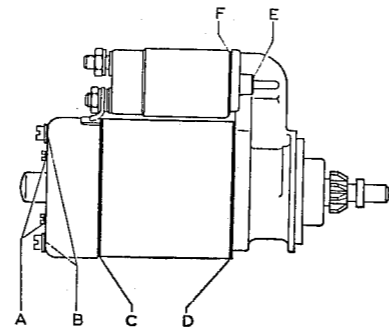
Seal the starter motor at the points indicated during assembly.
